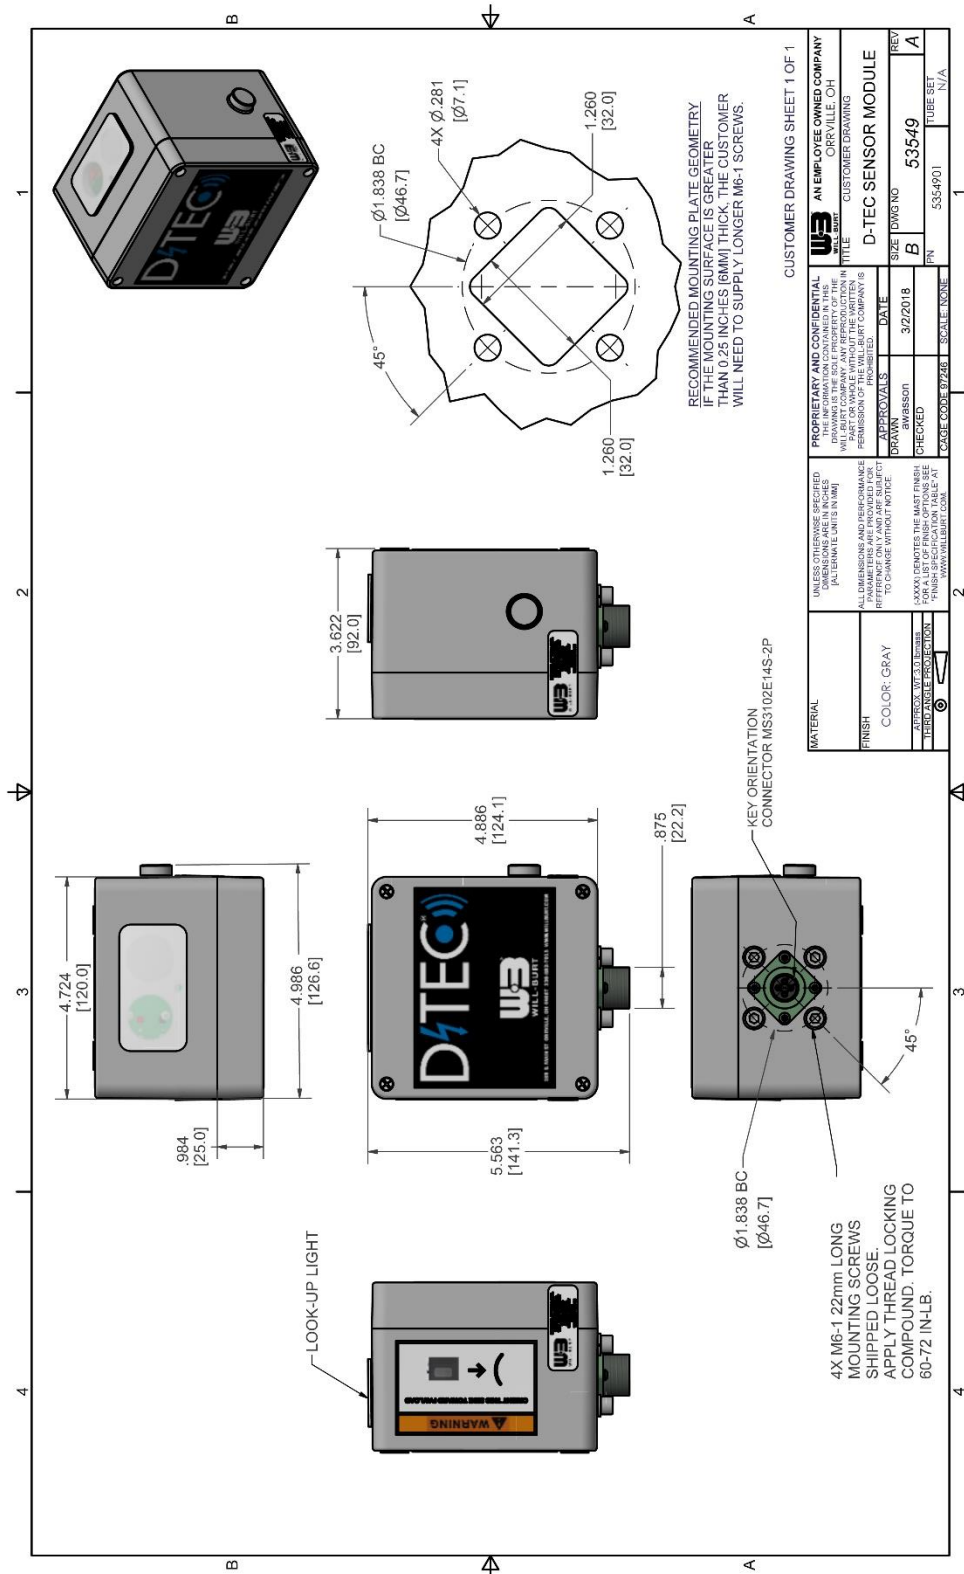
Sensor Dimensions (Measurements in Inches [Measurements in Millimeters])
